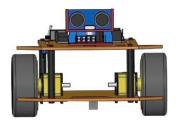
3D CAD Design of the Mobile Robot with Standard Wheels
